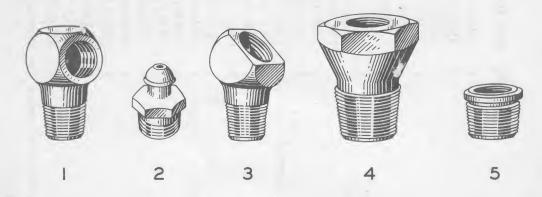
(sheet 1 of 2 sheets)—Parts Supplied with Tractor
